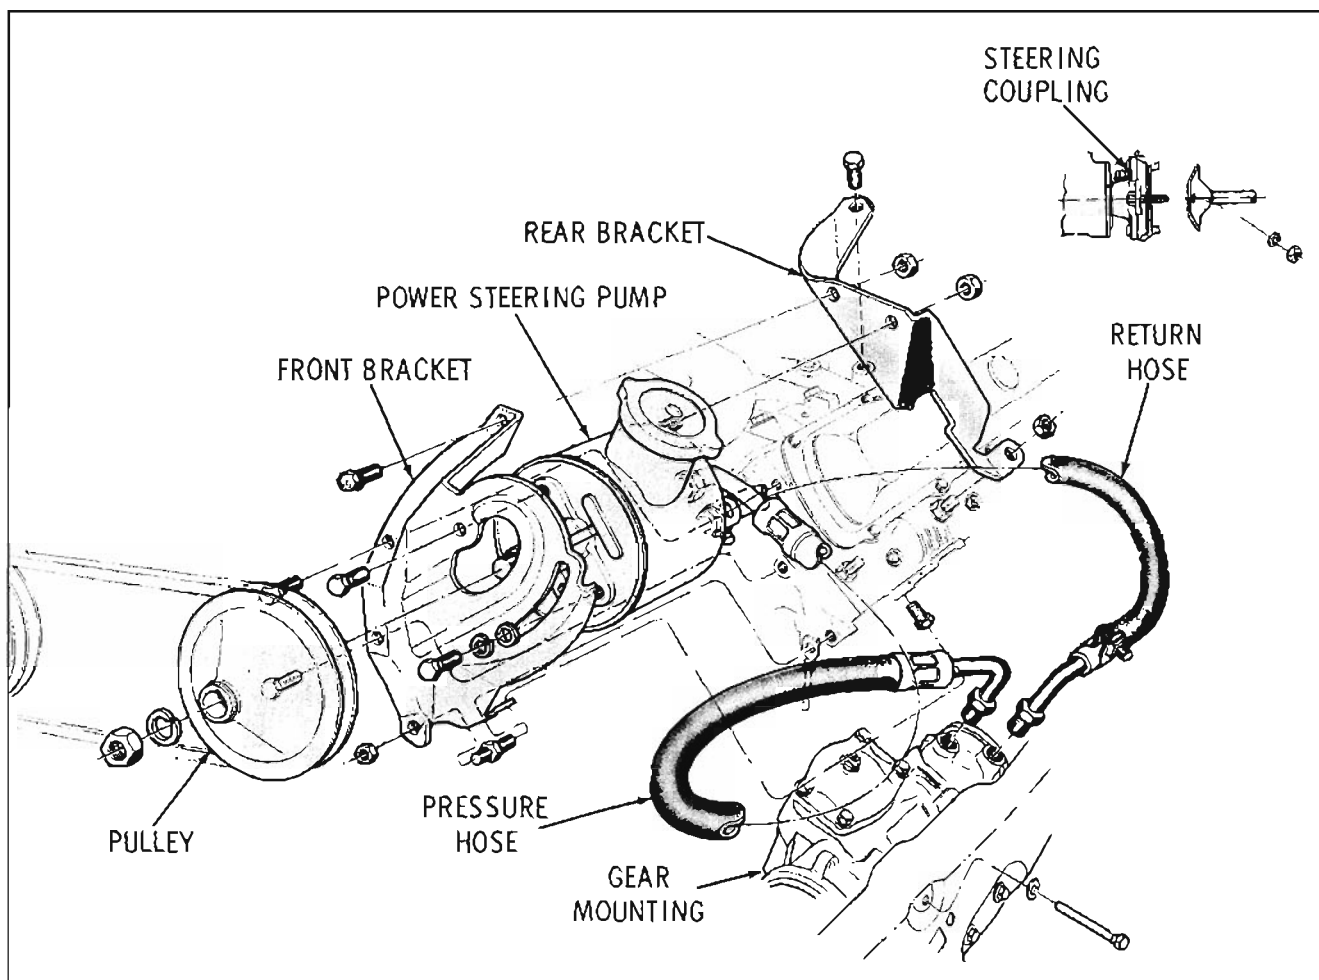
Pump Mounting (30 - 31 & 32 Series)
